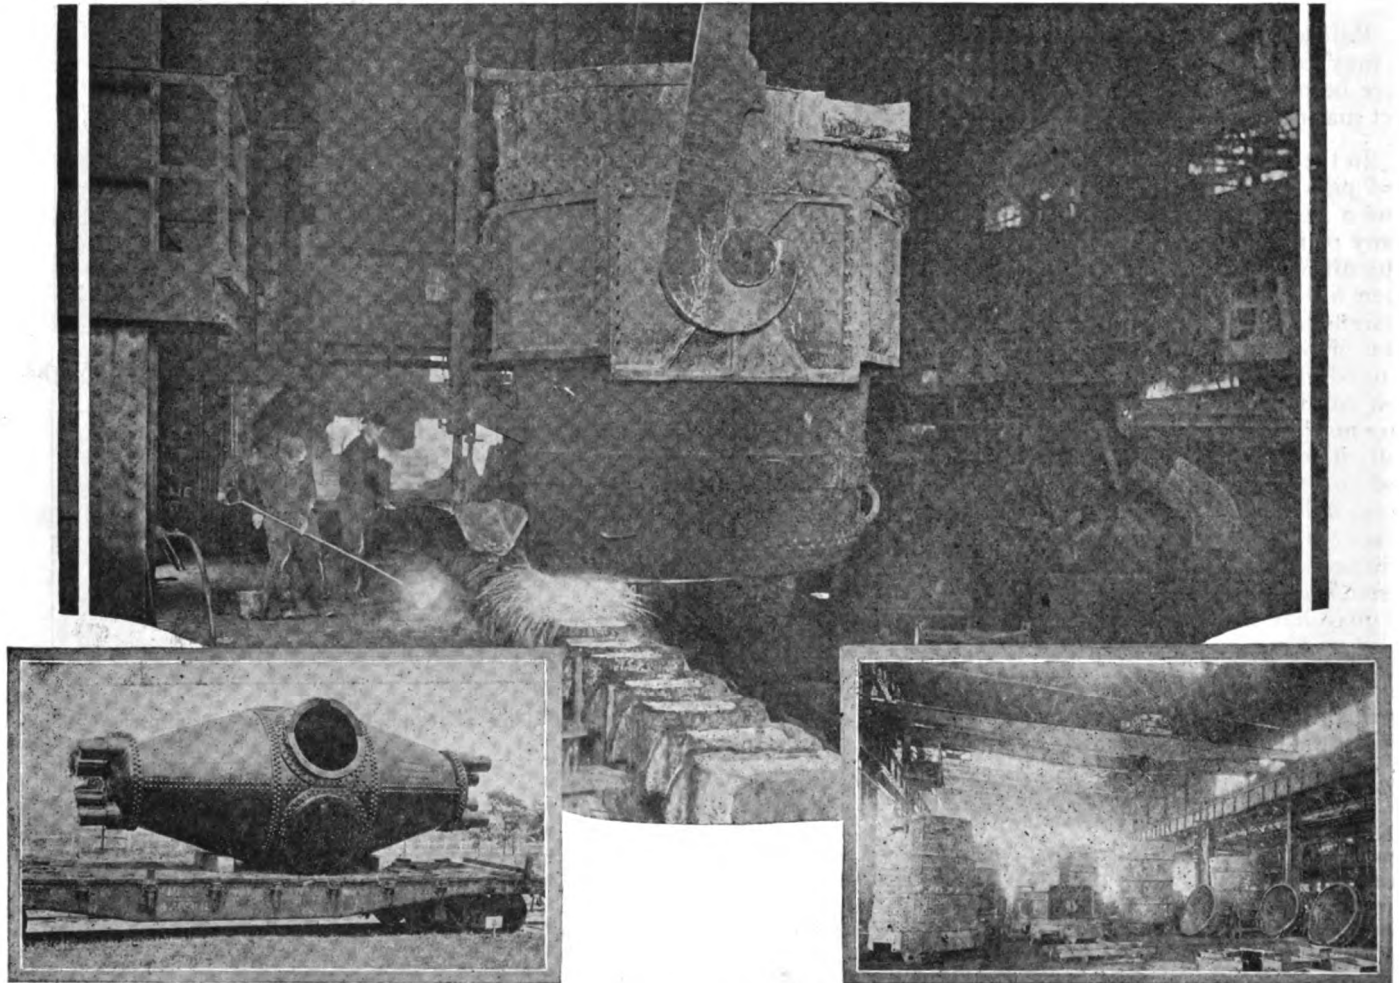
Pouring a heat with equipment built by the Treadwell Construction Company.
